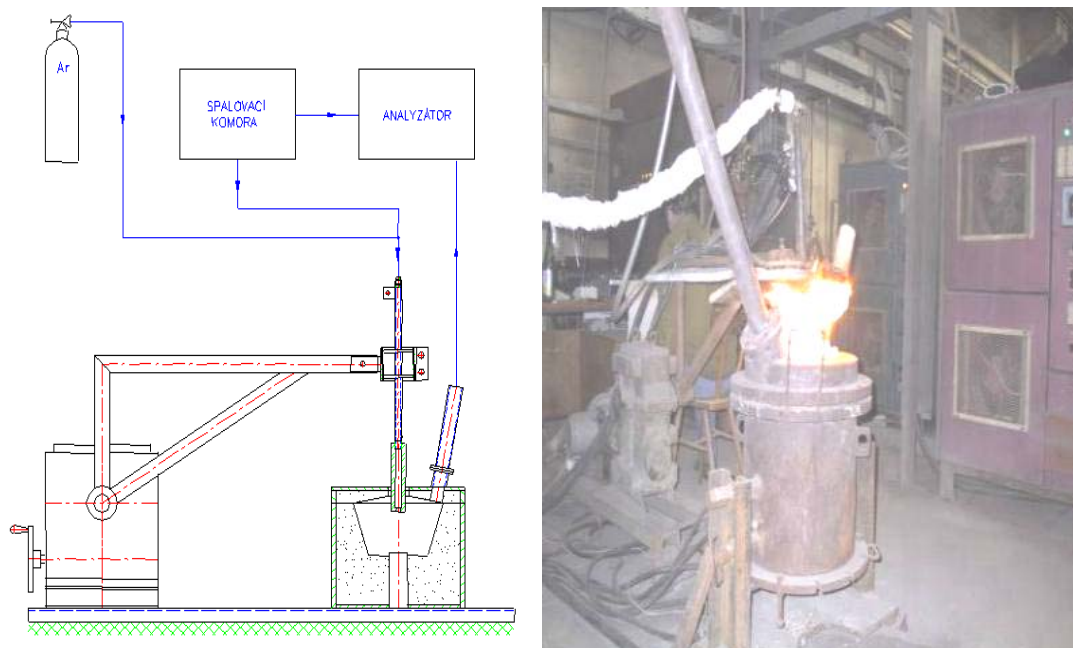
Scheme of experimental arrangement combustion chamber analyser
